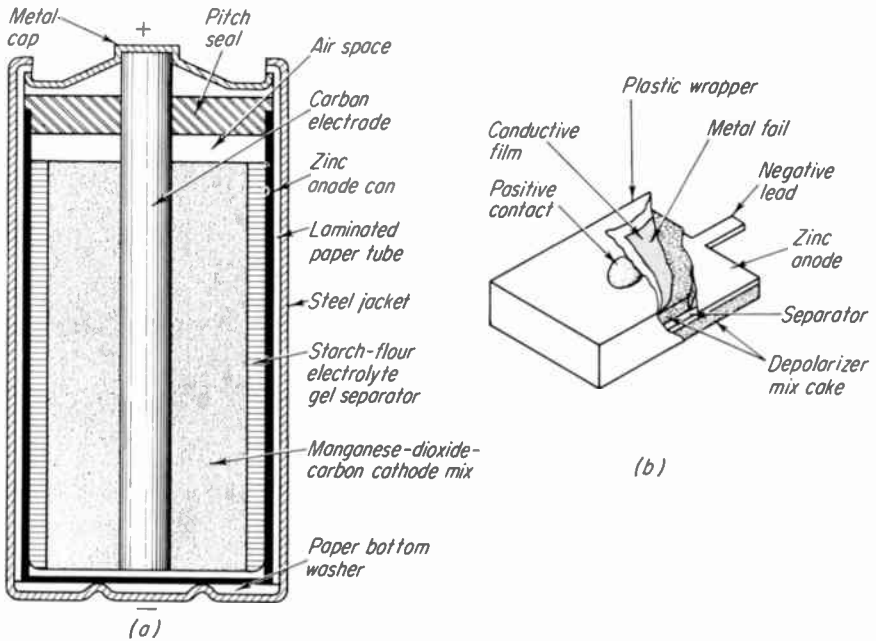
(a) Cross-sectional view of a cylindrical-type carbon-zinc cell. (b) Cutaway view of a flat-type carbon-zinc cell. (RCA)
